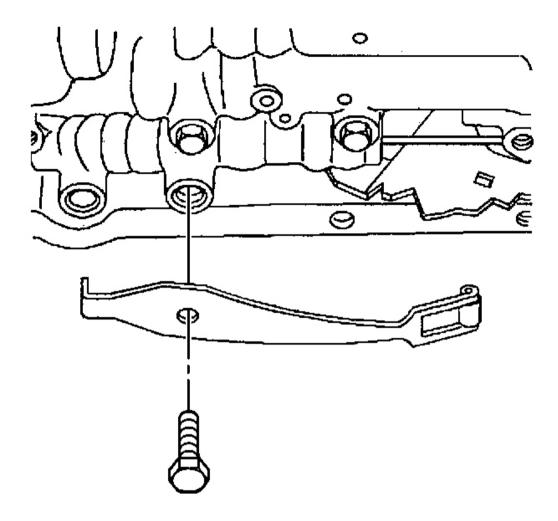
Identifying The Manual Detent Spring Courtesy of GENERAL MOTORS CORP.
